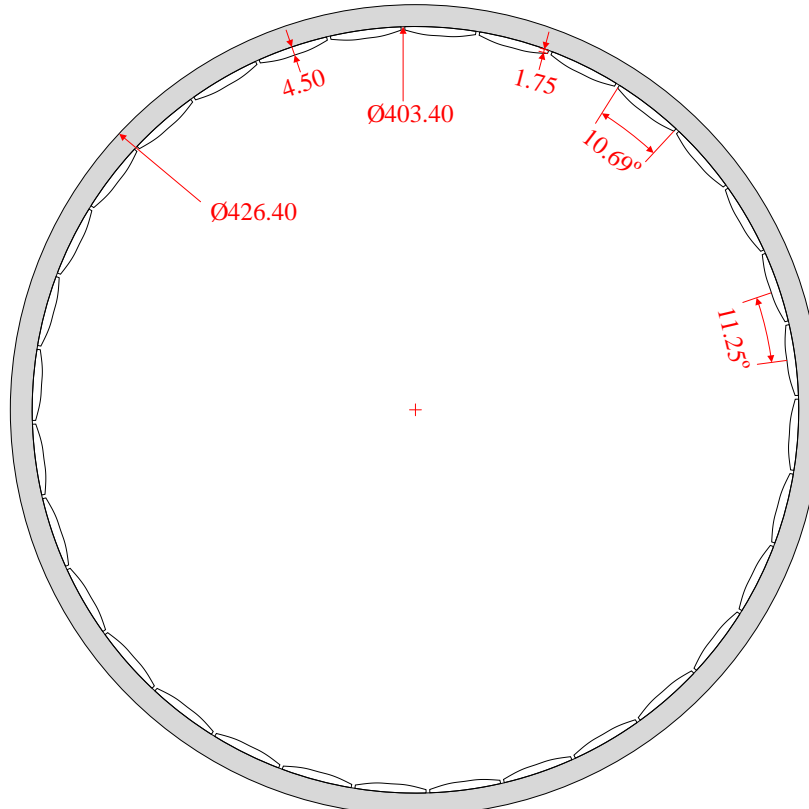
Rotor of 96S/32P Prototyped Machine.
